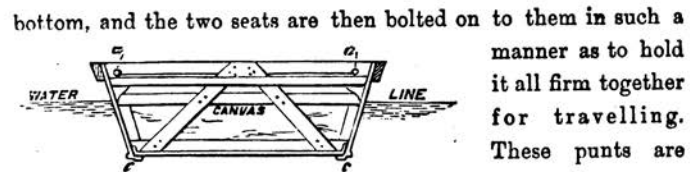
CROSS SECTION AND JOINT OF AMERICAN SHOOTING PUNT.
